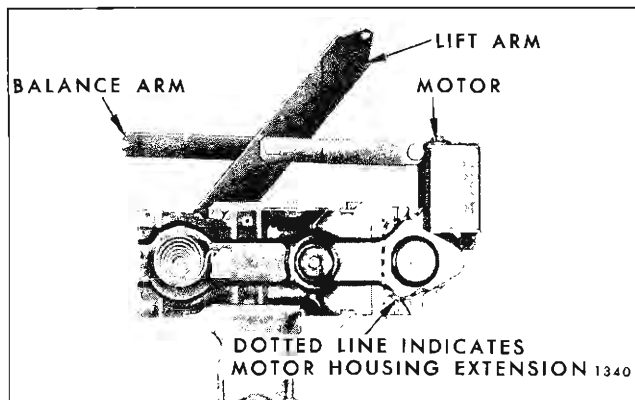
D77—Door Window Regulator and Electric Motor Assembly
